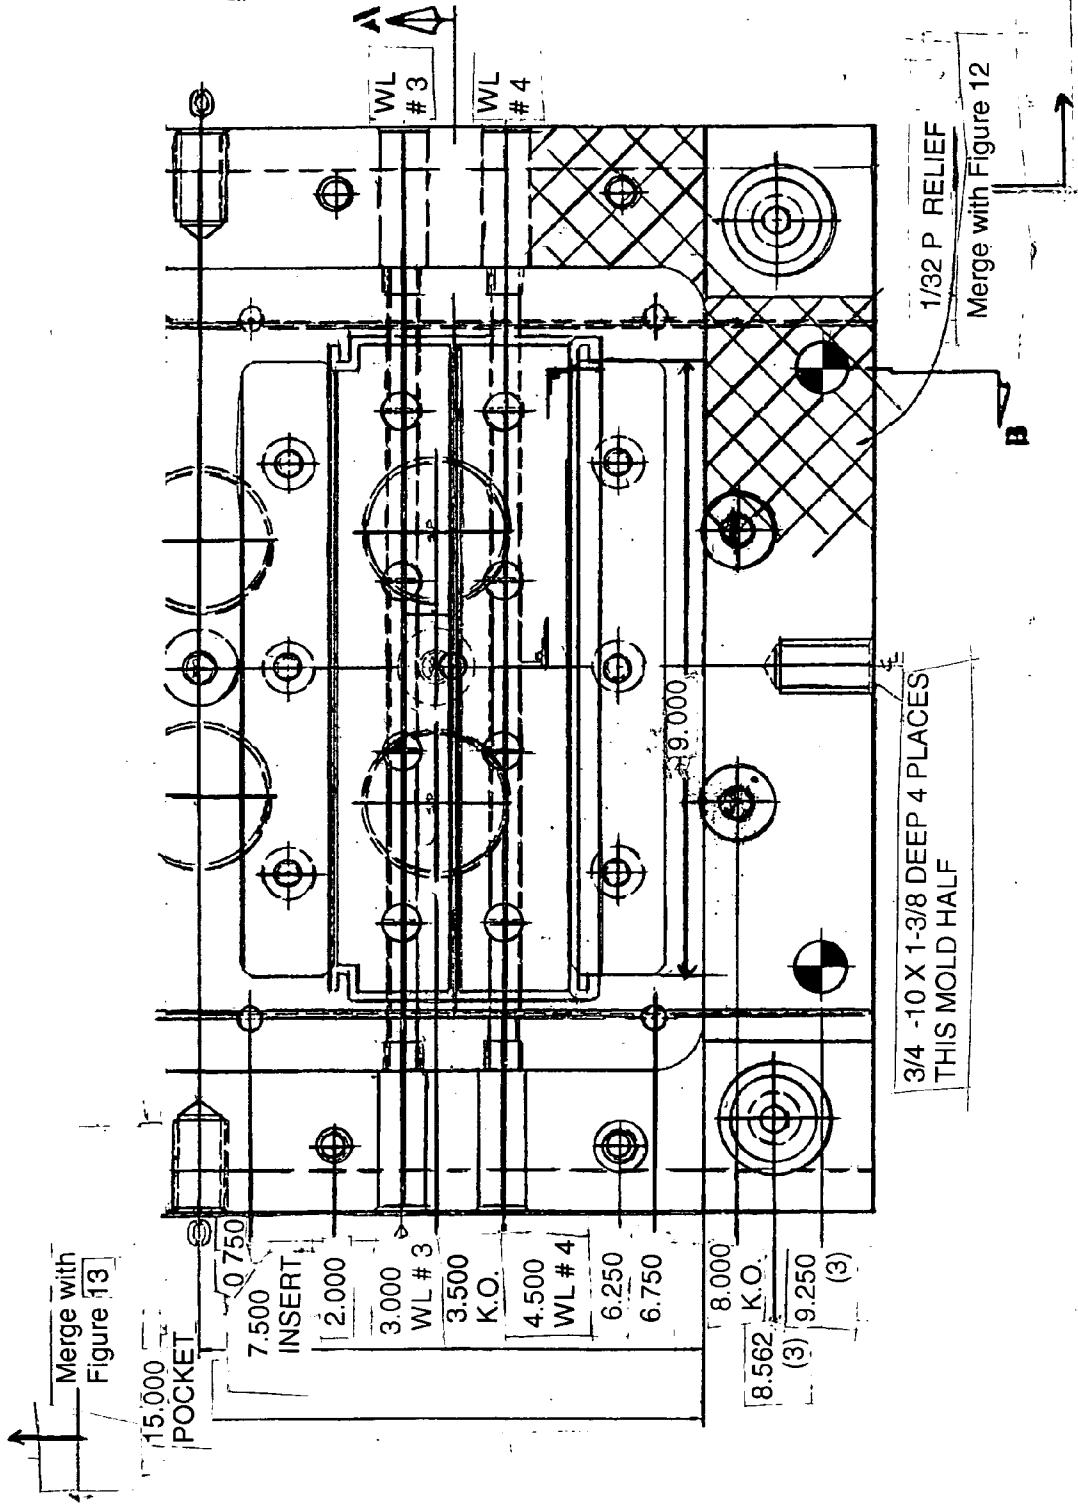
Section A-A – Two Cavity Injection Molds for Top and Bottom Housing,
